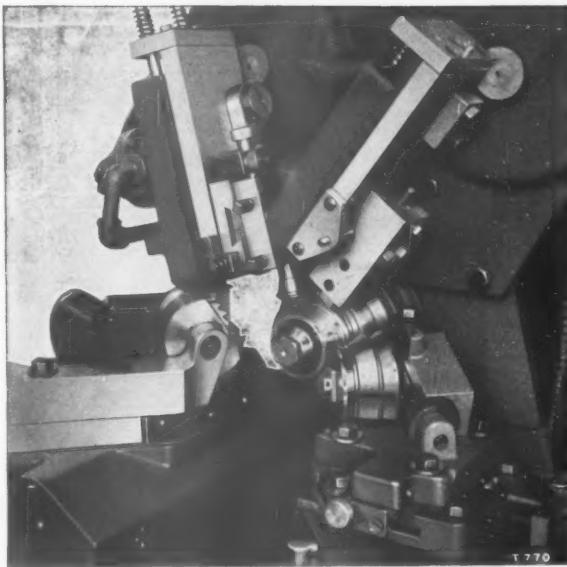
Close-up of Stub Lathe tooling for roughing, necking, and grooving as shown at right in Fig. 1.
